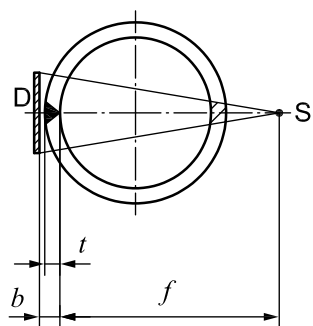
Test arrangement for double wall penetration single image of longitudinal welds
